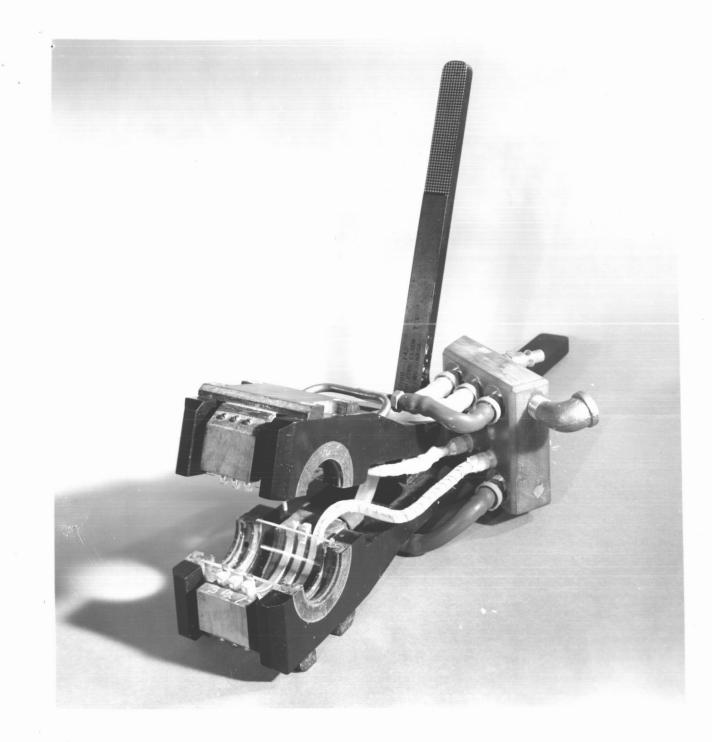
1 1/4" BRAZE TOOL FOR ELBOW & TEE FITTINGS
